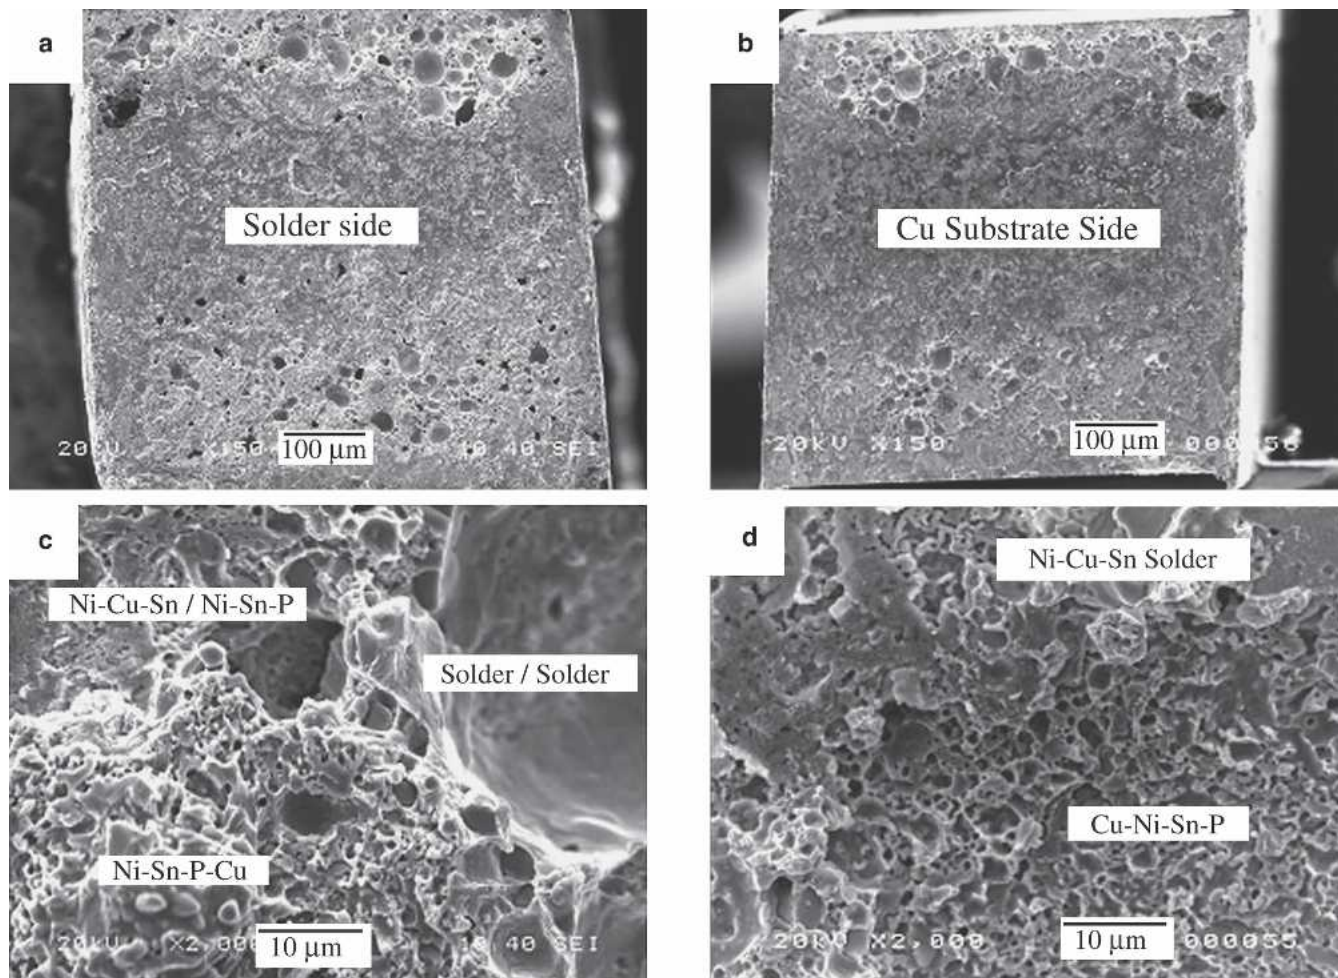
Fracture surfaces of low P sample after 20 reflows: (a) solder side; (b) Cu substrate side; (c) magnified image of solder side; and (d) magnified image of Cu substrate side, showing that fracture occurred at mixed solder/solder, solder/Ni-Cu-Sn, Ni-Cu-Sn/Ni-Sn-P, and Ni-Sn-P/Cu interfaces.
